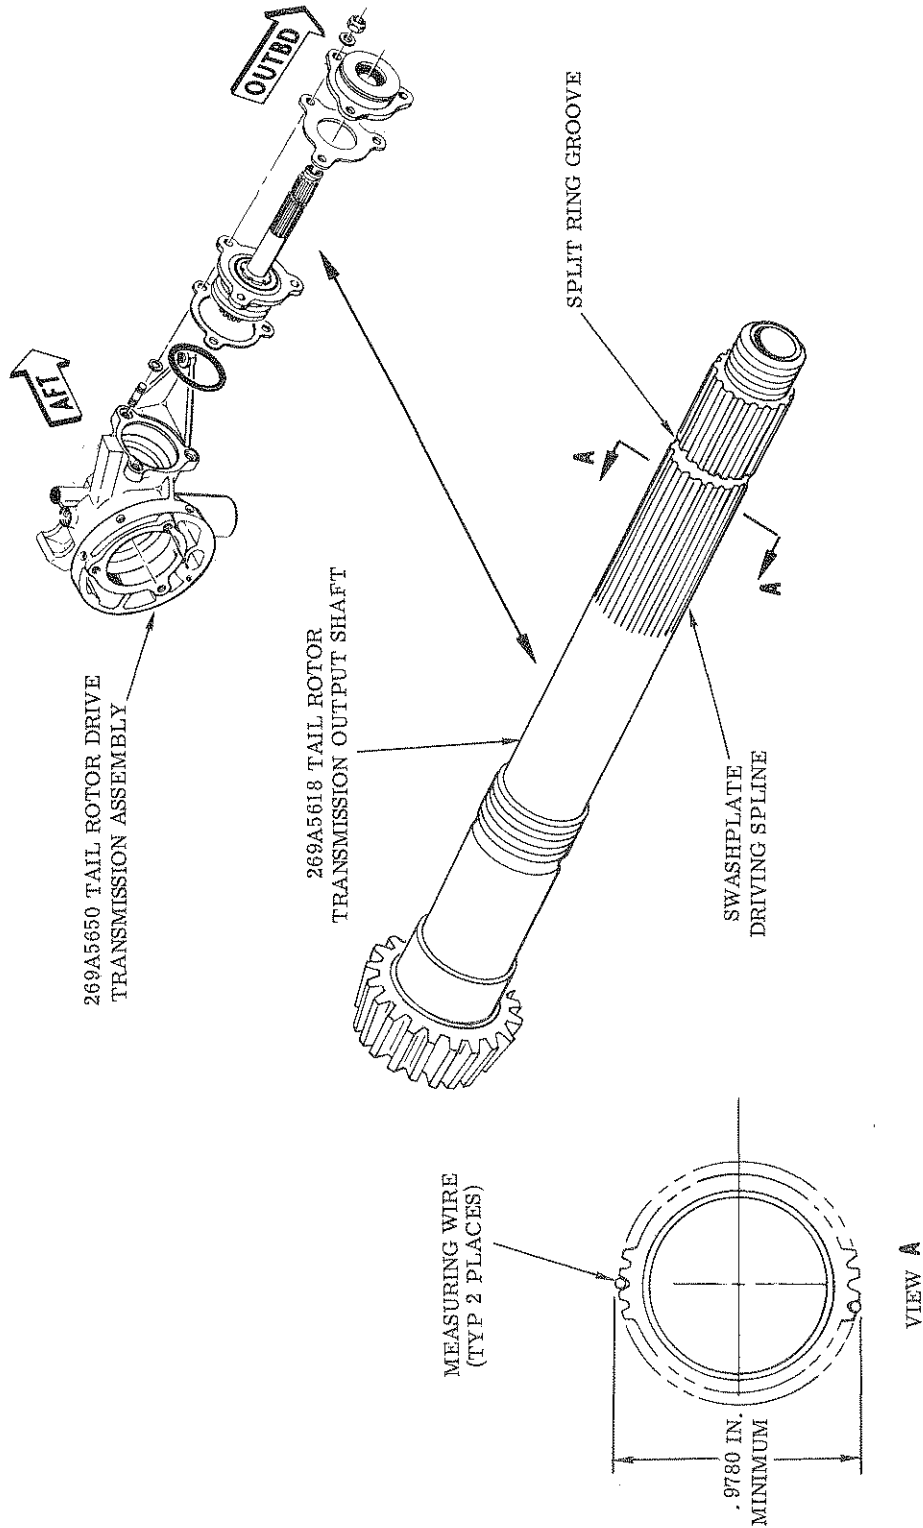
WEAR TOLERANCE- OUTPUT SHAFT, TAIL ROTOR TRANSMISSION
